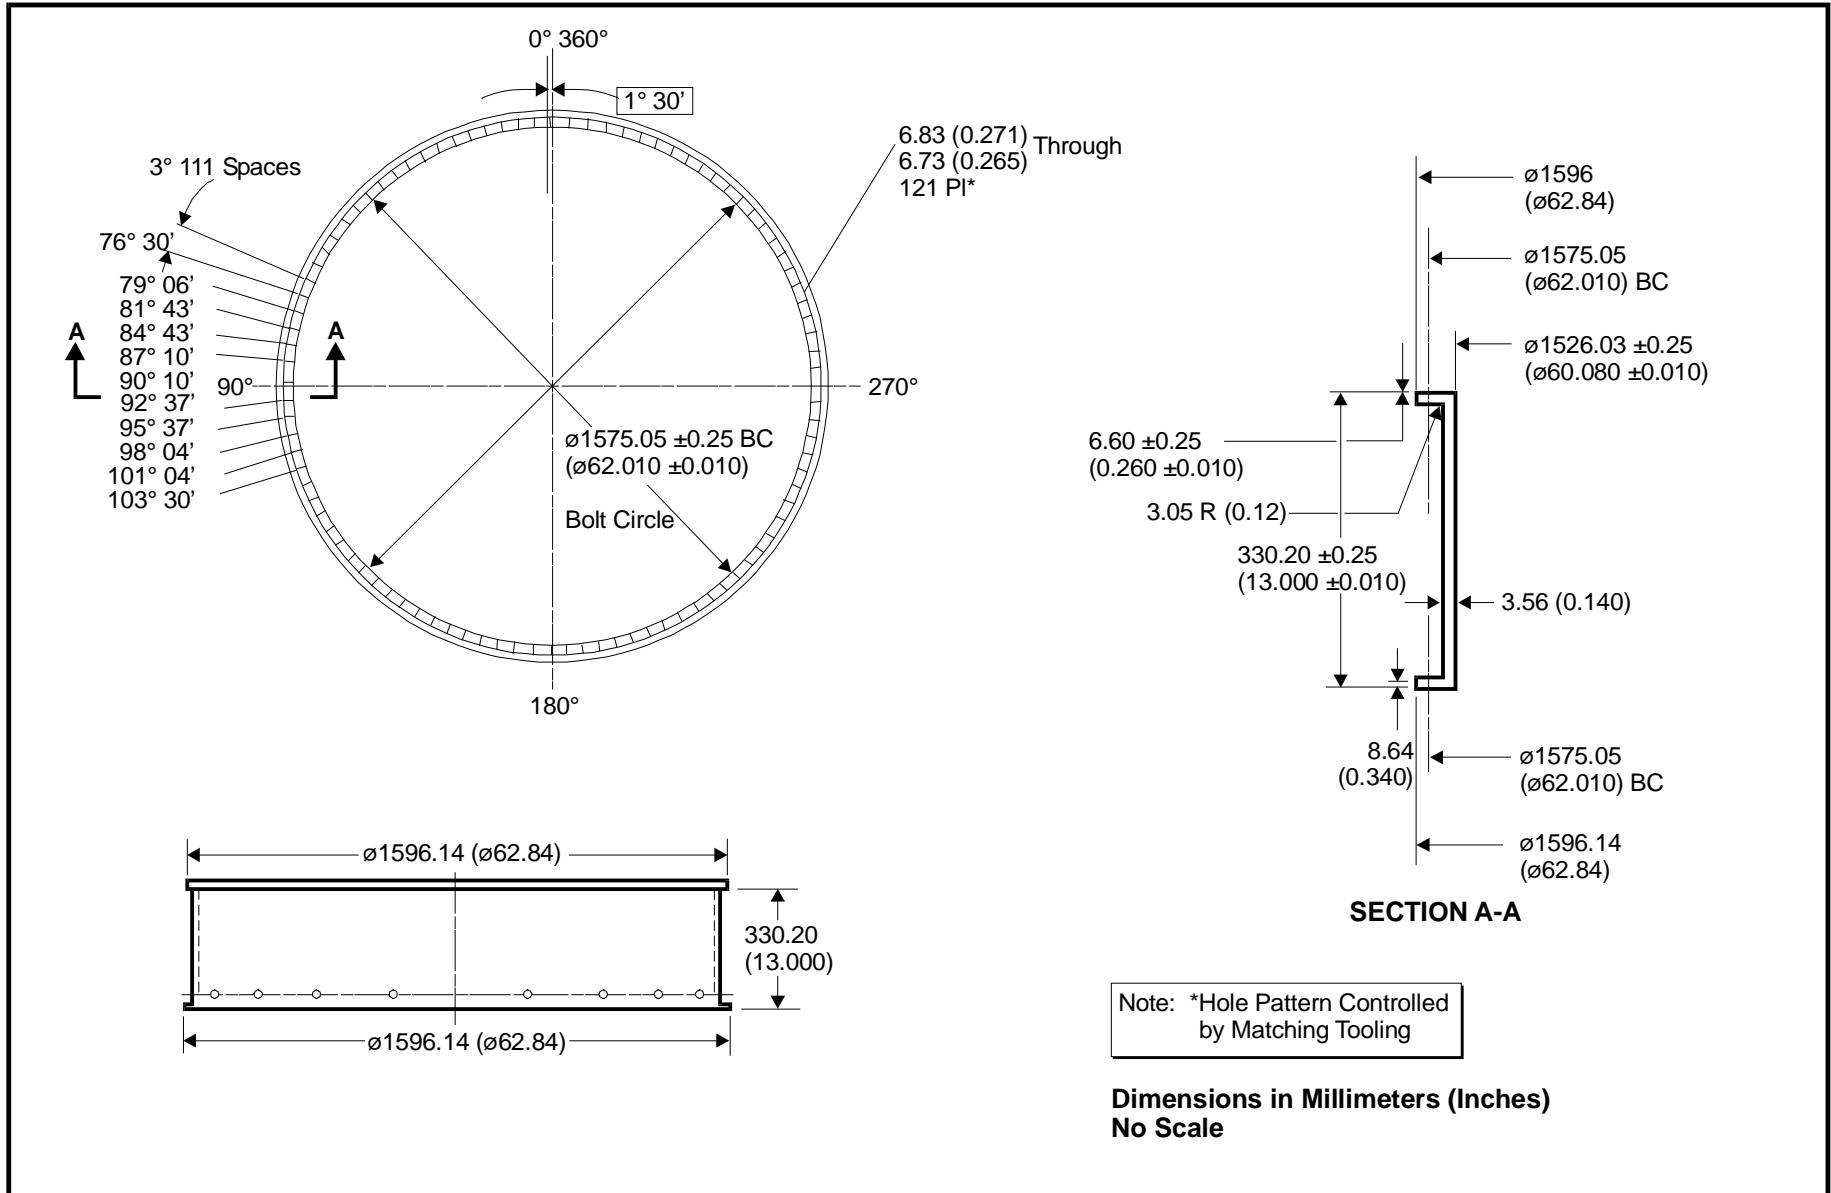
Type C1 Payload Adapter Mechanical Interfaces
